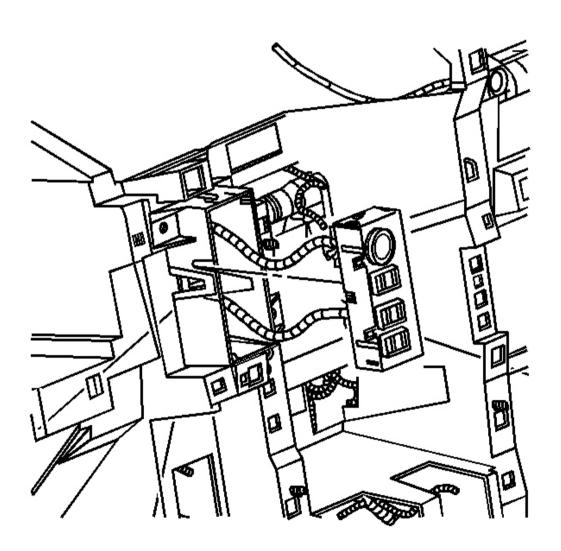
Shift Control/Selector Switch Courtesy of GENERAL MOTORS CORP.
